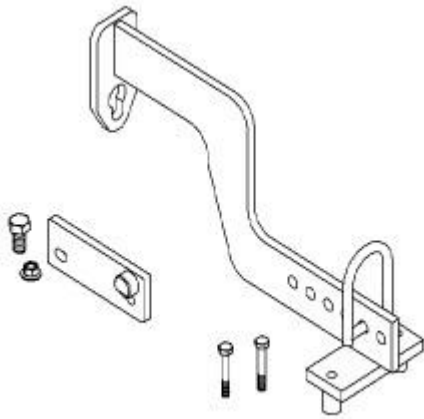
ENGINE LIFT FIXTURE - 8984A
